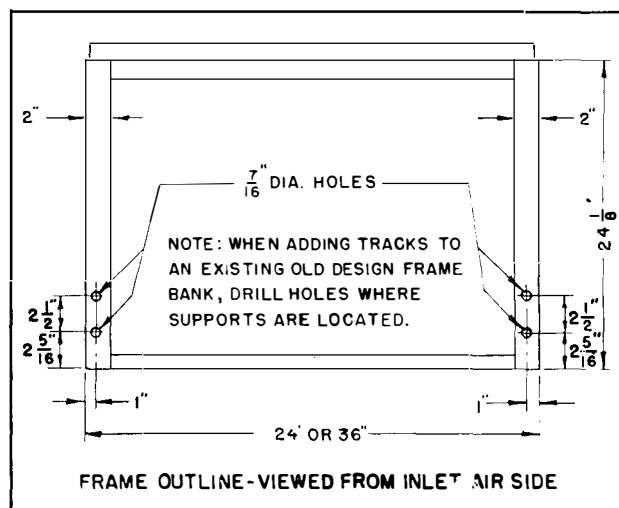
Location of Track Support Mounting Holes (for Existing Frame Banks only)
